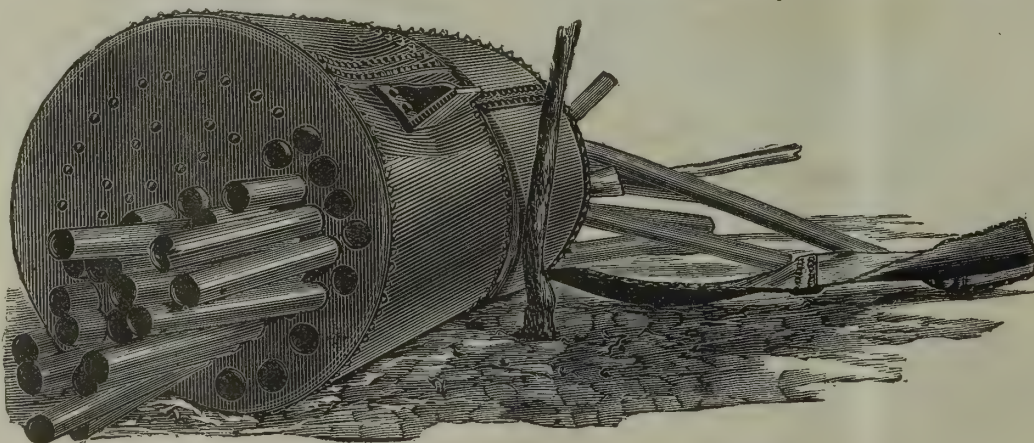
Rear view of the part of No. 3 boiler which is shown in Fig. 2.
